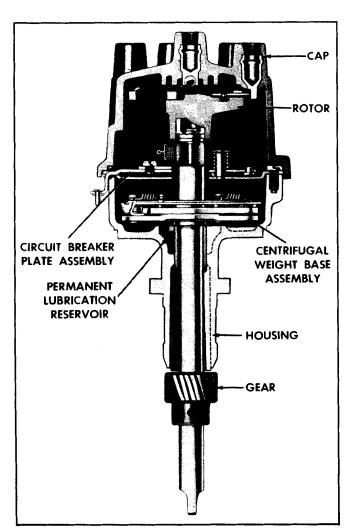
E-41 Cross Section of 6-Cyl. Distributor
